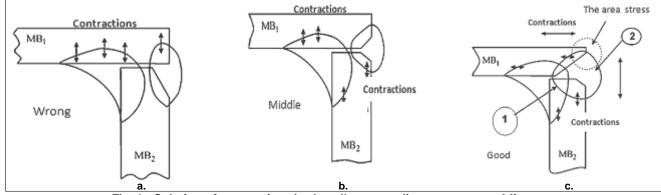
Solutions for removing the lamellar unraveling at corner welding
